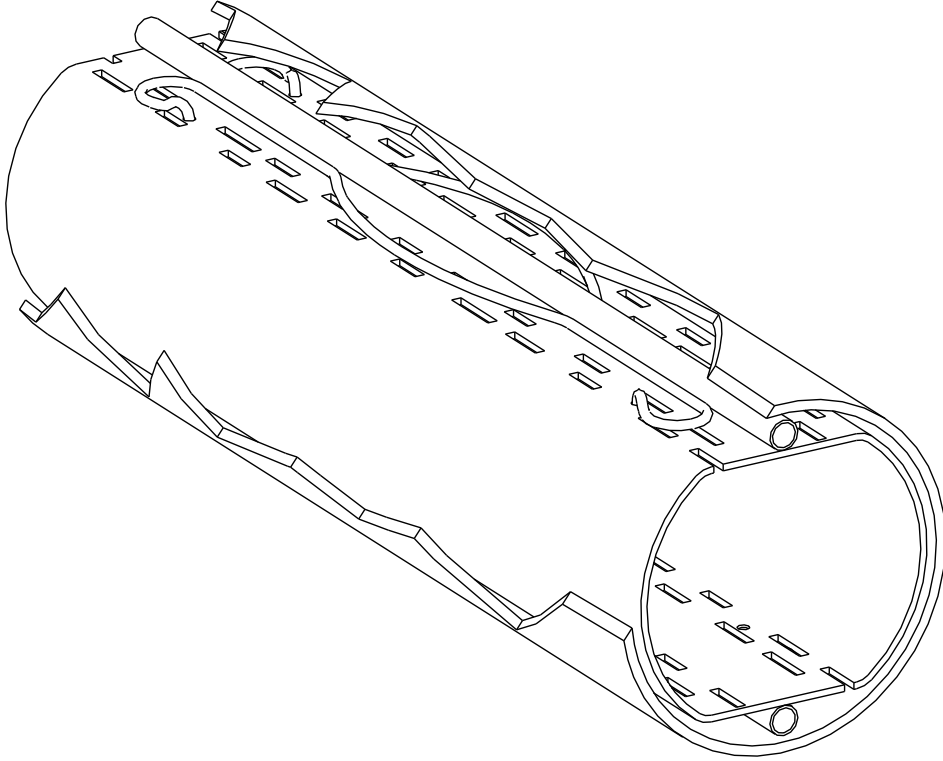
Cut-away drawing of the LHC vacuum chamber, perforated beam screen, cooling pipes and support springs.
